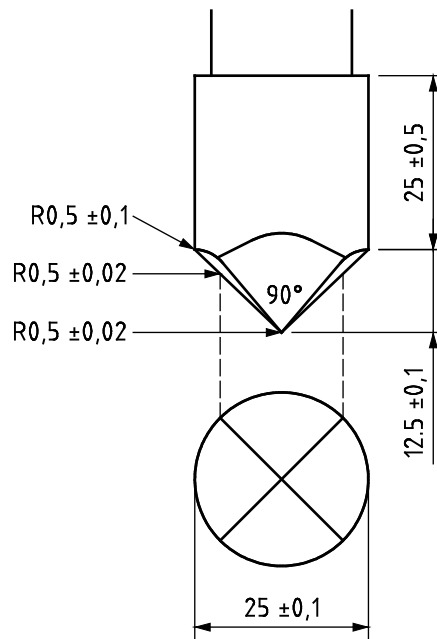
Loading piston (e.g. with cylindrical upper part)
